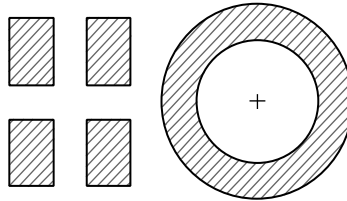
Example PCB Land Pattern with No Enclosing Rectangle
